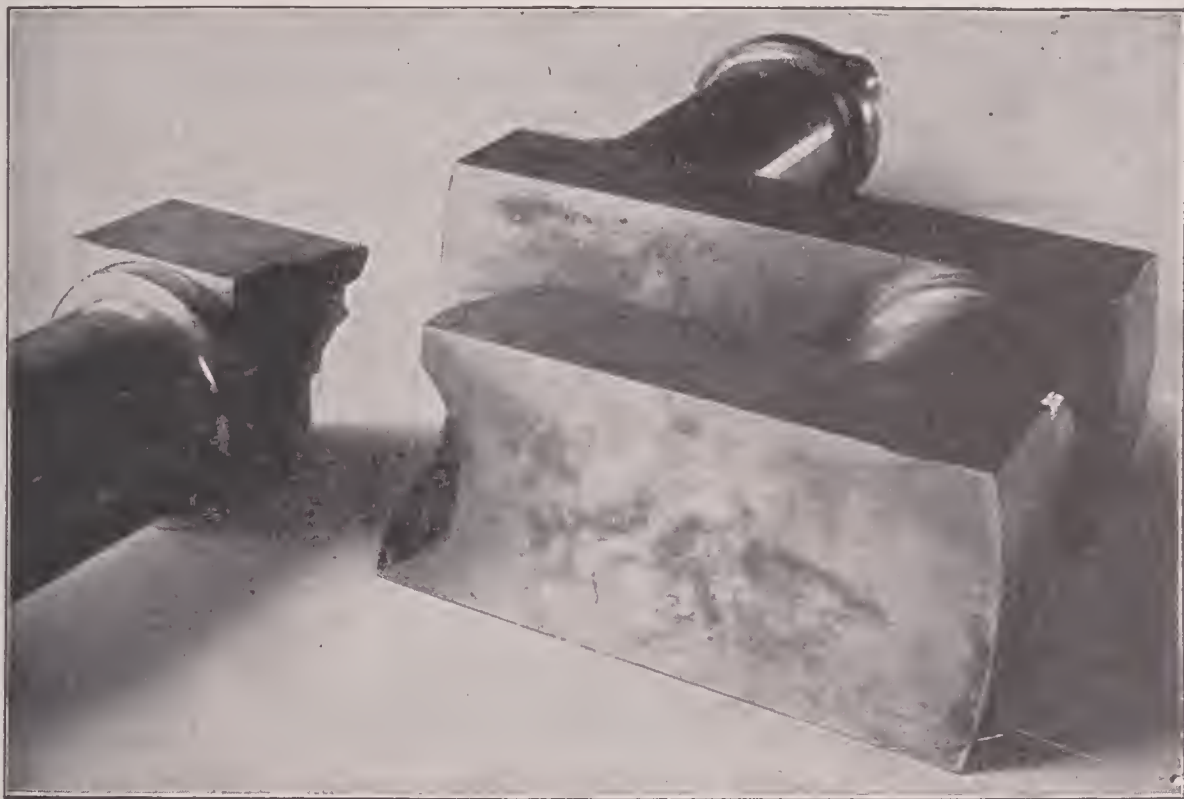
Broken Shaft from 20 H.P. Vertical Engine.
